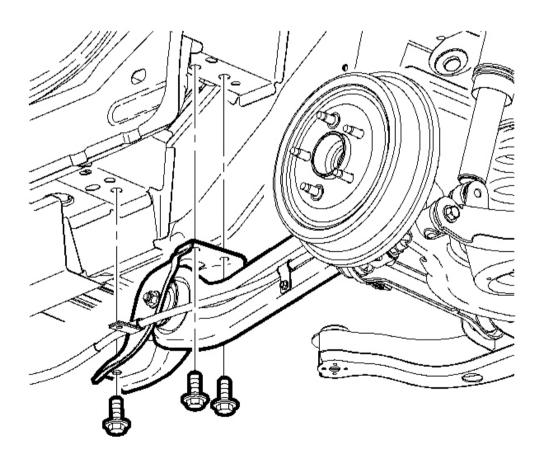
Rear Axle Upper Control Trailing Arm Bracket & Body Bolts
